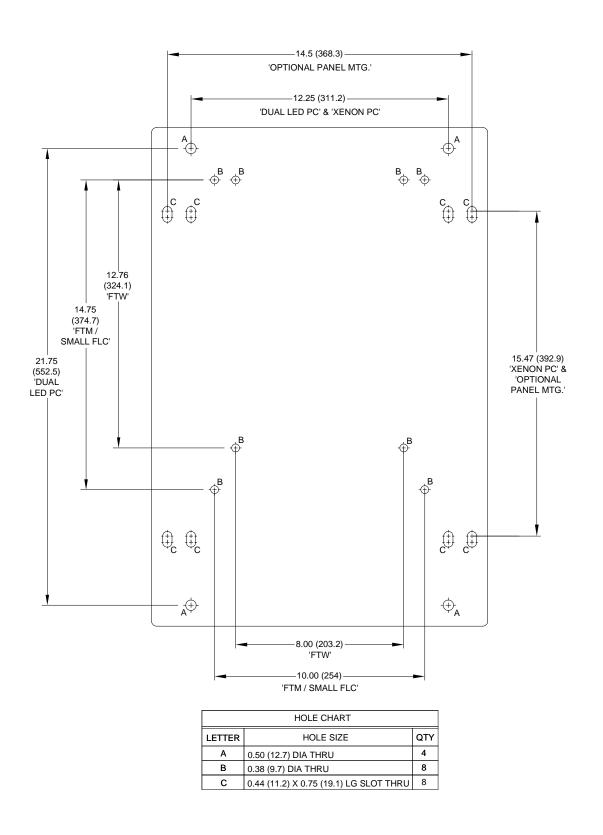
Adapter Mounting Panel Mounting and Outline (Optional)
